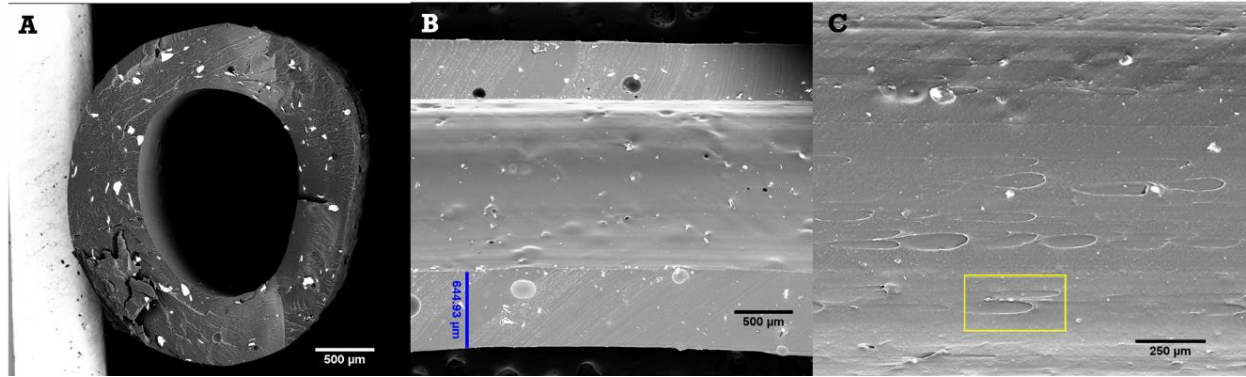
Backscatter ESEM images of common extrusion defects. (A) Cross section of an extruded sample after cryofracture, showing fractured particles. (B) Inner lumen of an extrusion after blade sectioning, showing shear marks. (C) Extrusion sample after sectioning, showing air pockets within the wall.
